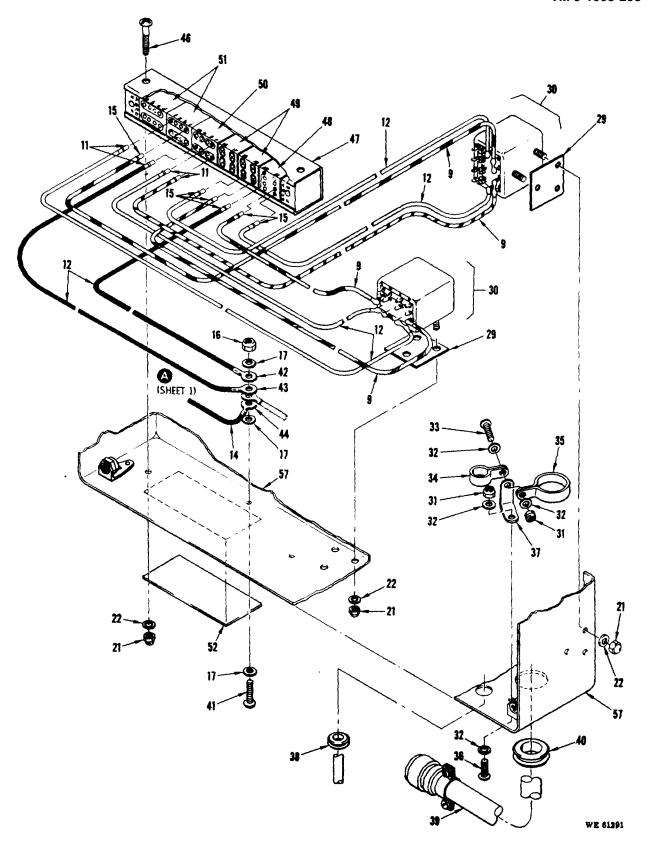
(3). Control box subassembly partially exploded view (sheet 3 of 3).
